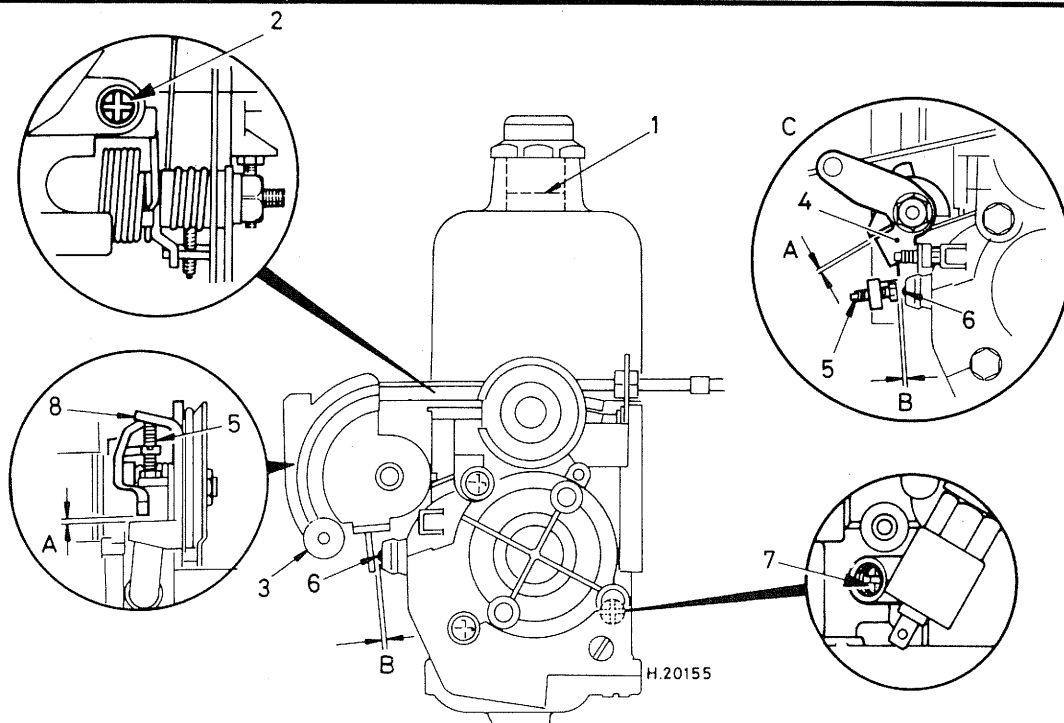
Electronic type HIF carburettor tuning points (Sec 14)
